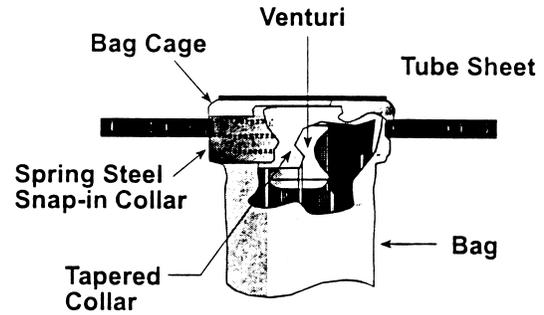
How bags are mounted to cage, sealed to tube sheet, and installed in baghouse.
